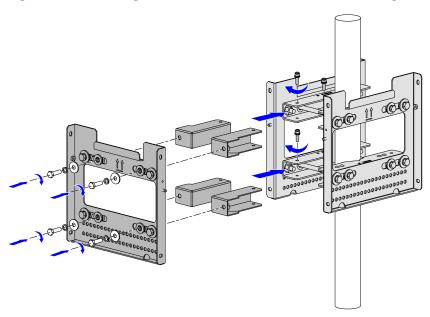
Securing Two Sets of Installation Assemblies Back to Back
